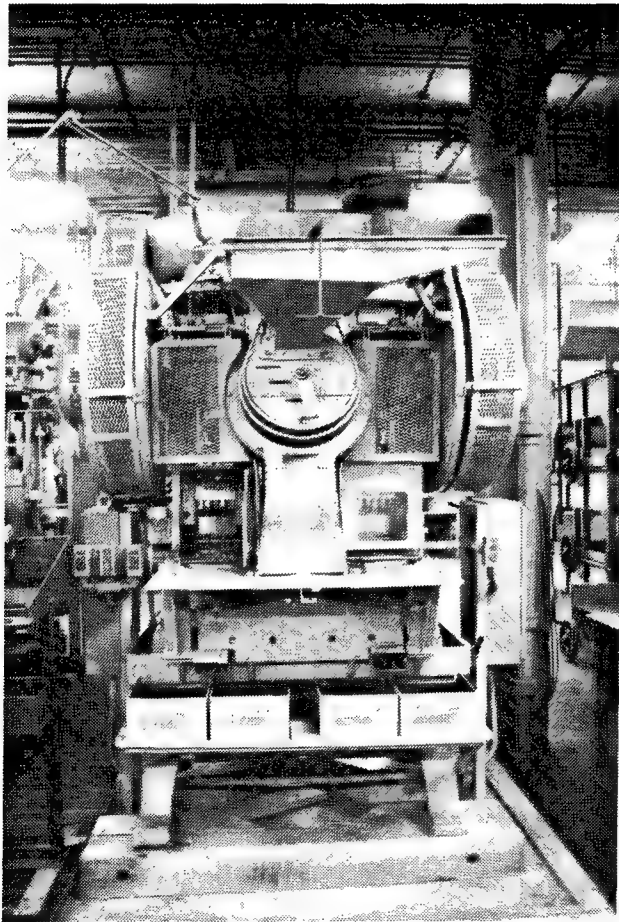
Building 4: First Case Draw Machine manufactured by E. W. Bliss Co.
